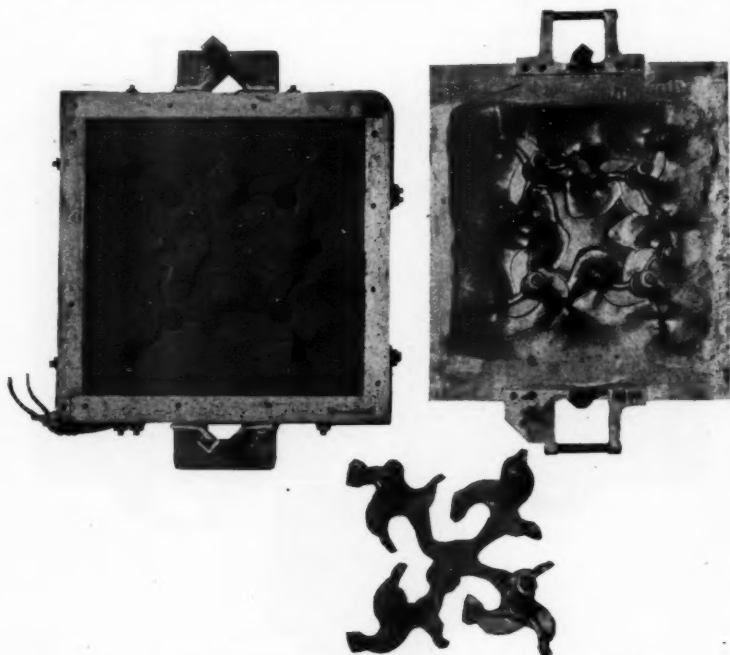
LAWN MOWER PART MOUNTED FOR TABOR MACHINE.
